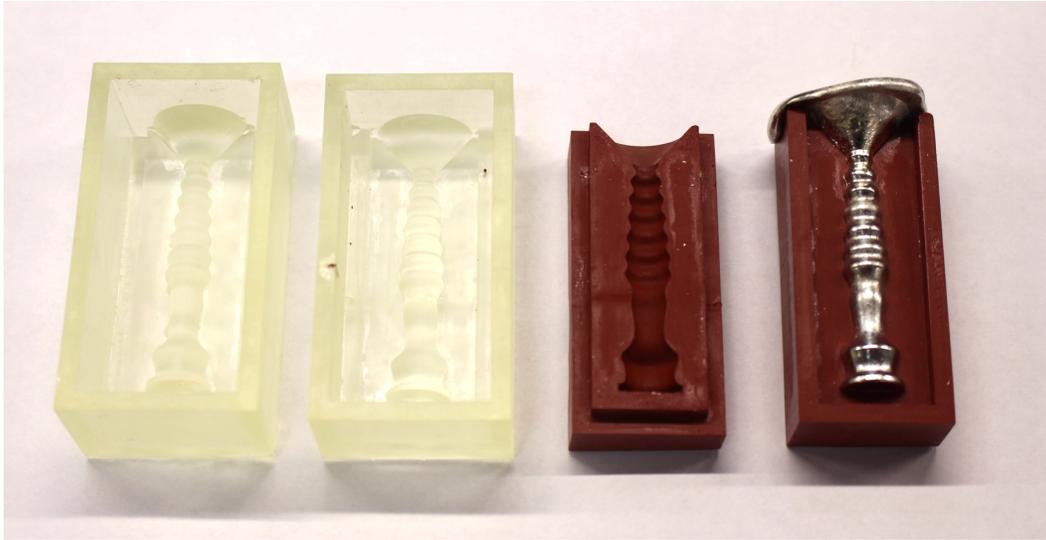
The image shows the 3D-printed positive mold, heat resistant negative mold, and casted sample.
